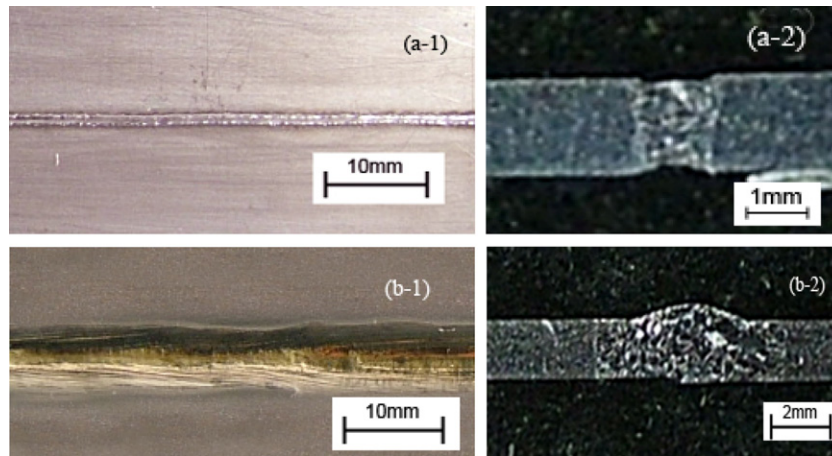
Comparison of welded joints at a welding speed of 9 m/min: (a-1) top bead appearance of a fiber laser welded joint; (a-2) cross section of a fiber laser welded joint; (b-1) Top bead appearance of a laser-GMA hybrid welded joint; (b-2) cross section of a laser-GMA hybrid welded joint.
